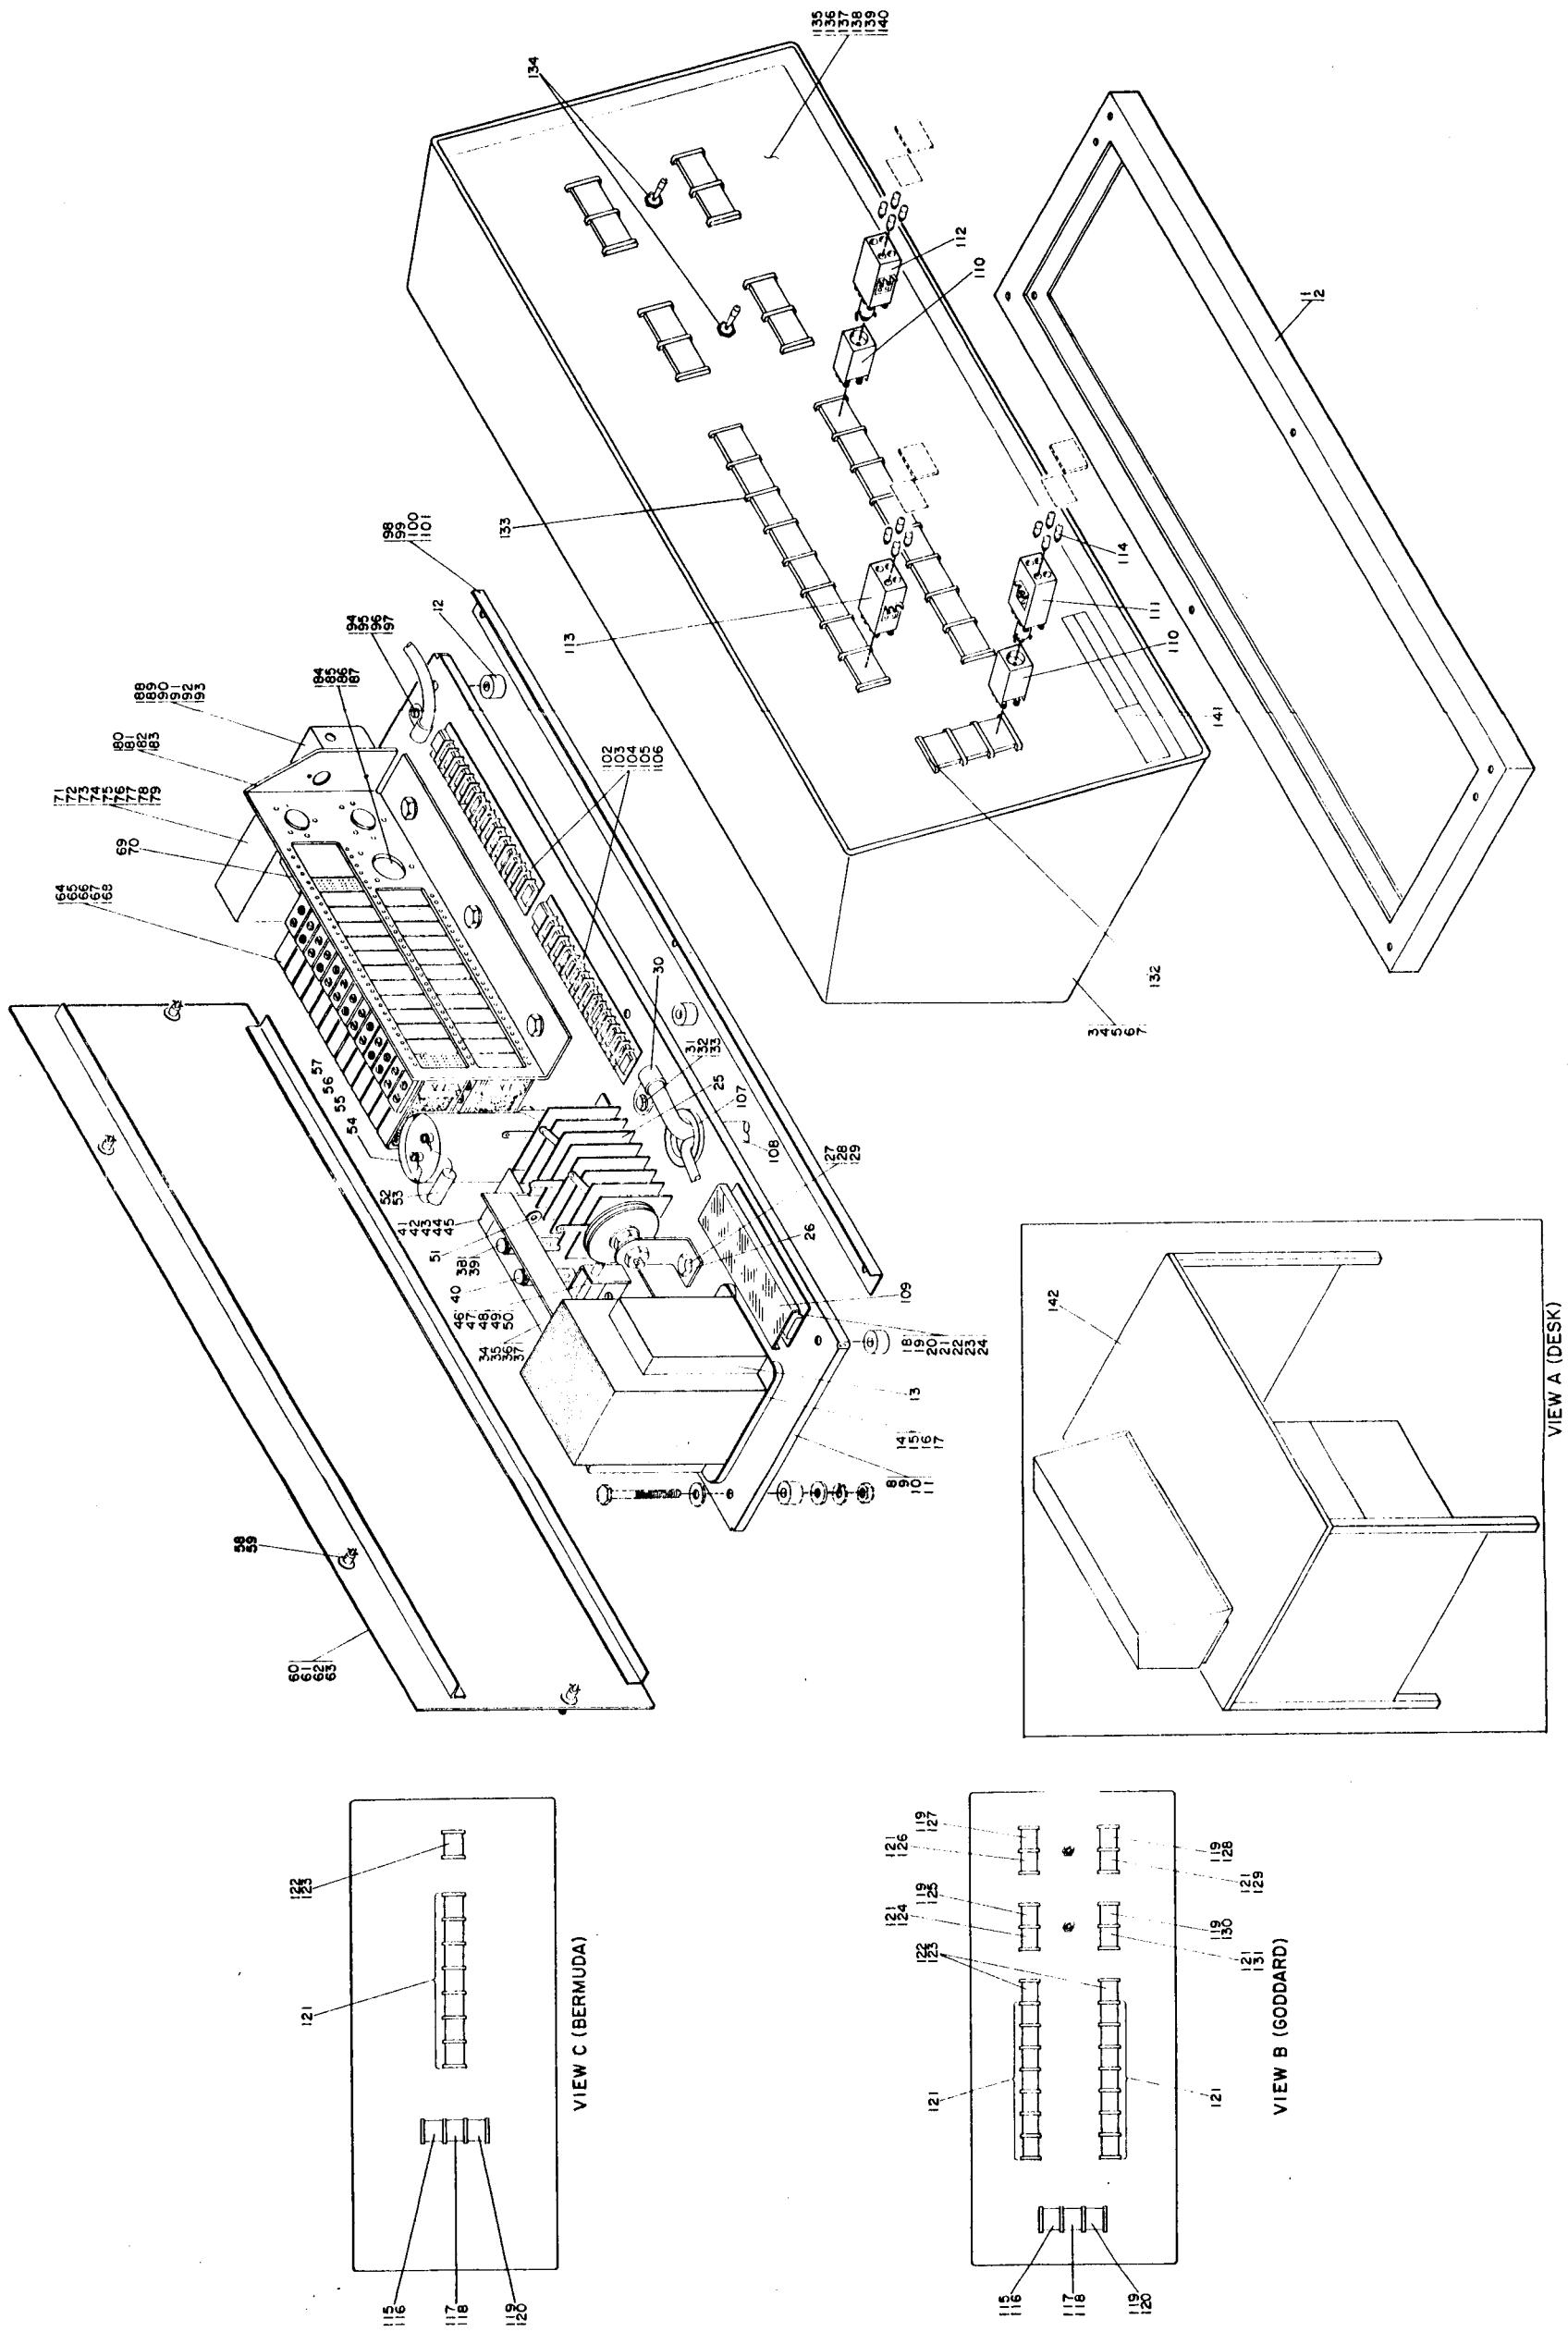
OUTPUT STATUS CONSOLE, EXPLODED VIEW (COMPOSITE)
